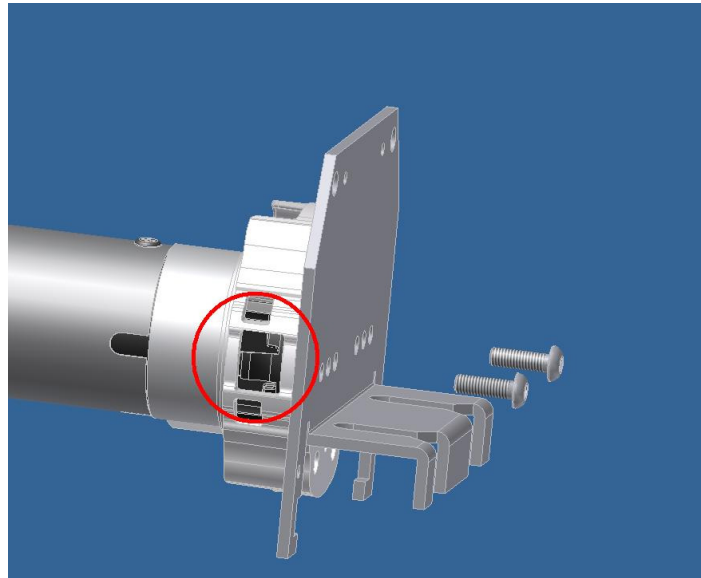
c. Position of plastic clips in iron adapter and screws from engine in Inceel Screen.
